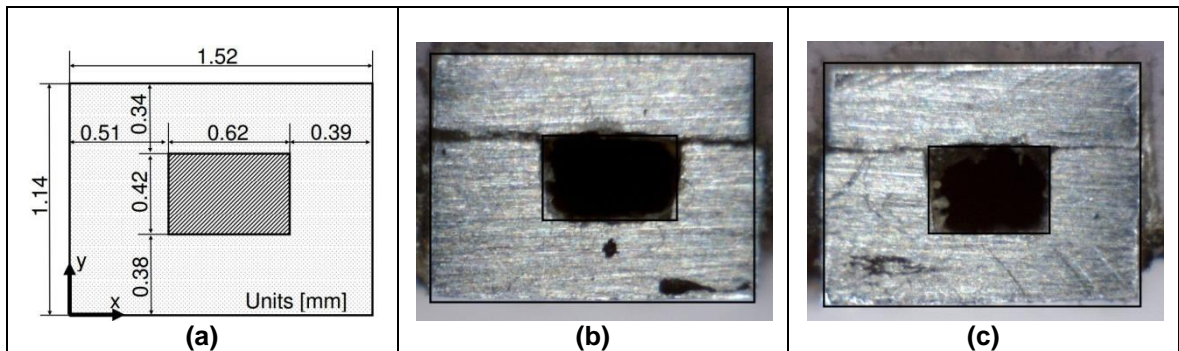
Test Section 1 cross-section: (a) actual measured channel dimensions, (b) photograph of inlet side of the channel and (c) photograph of the outlet side of the channel
